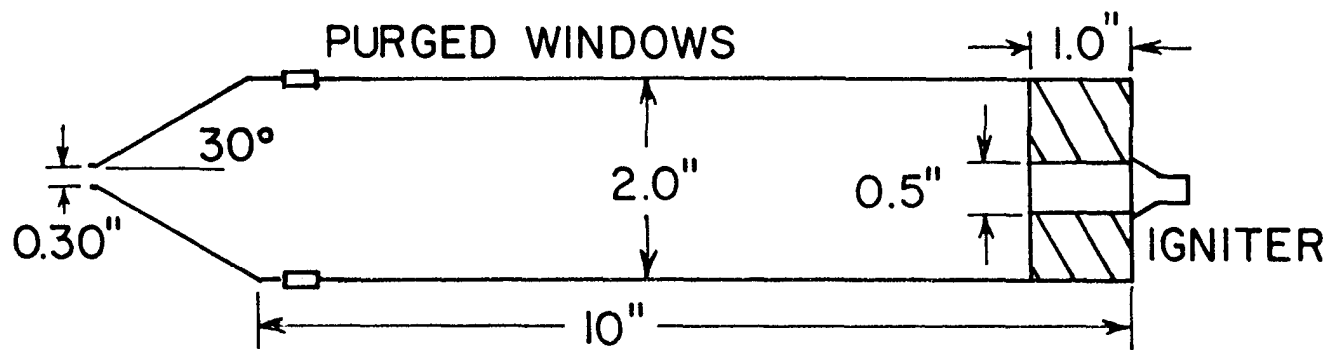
Dimensions of Small Solid Propellant Rocket Motor
